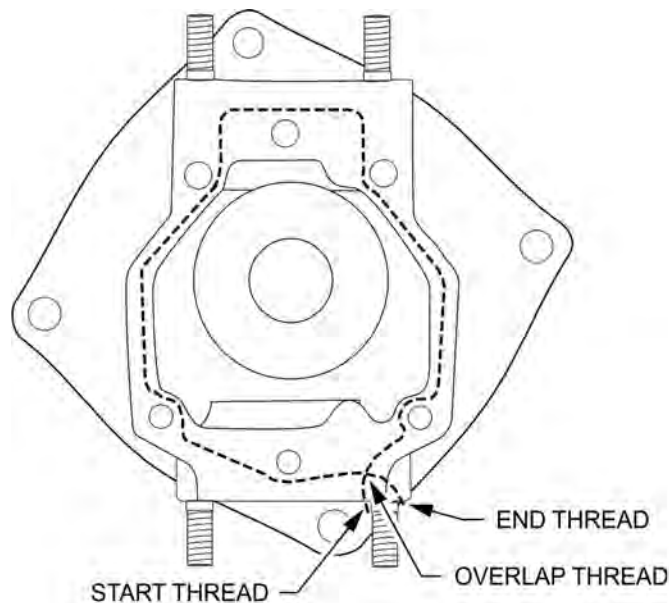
Threading Diagram, Accessory Starter Drive Adapter Assemblies 641348 & 653074
